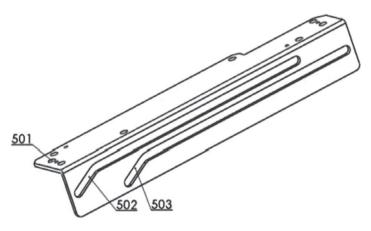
The structure of guide rail. 501: fixing hole; 502: first sliding rail; 503: second sliding rail.
